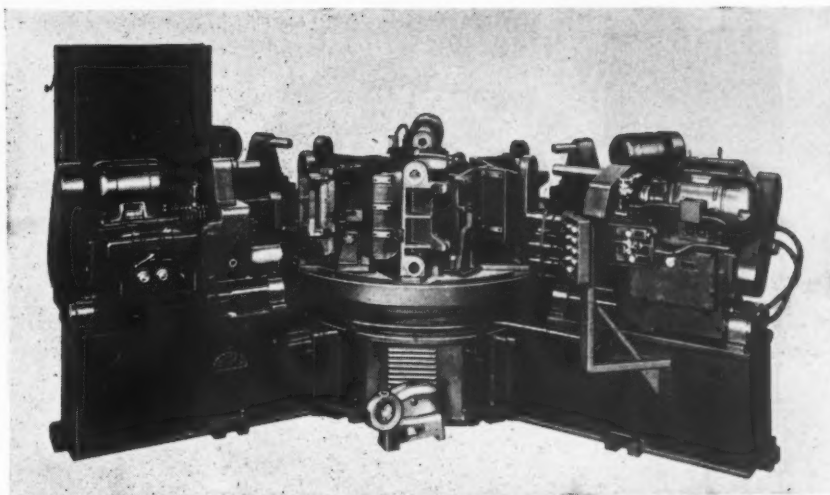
Special Machine Designed for Machining Steering-gear Housings by the Snyder Tool & Engineering Co.
